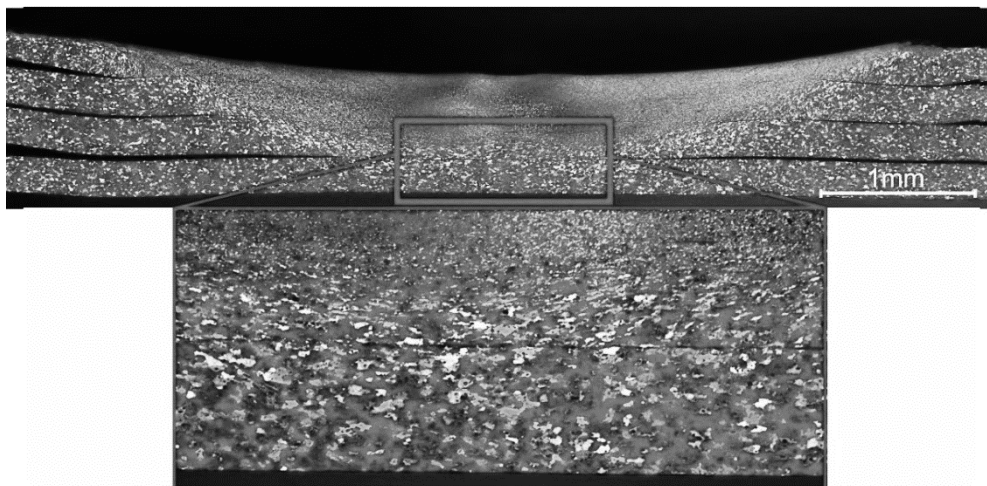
Sample welded with tool T1; rotational speed 4000 RPM, axial load 2 kN and penetration depth 0.25 mm (the last two sheets were not bonded)
